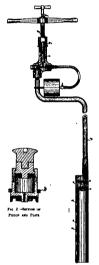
,-Sectional elevation of the hydraulic mining cartridge.
